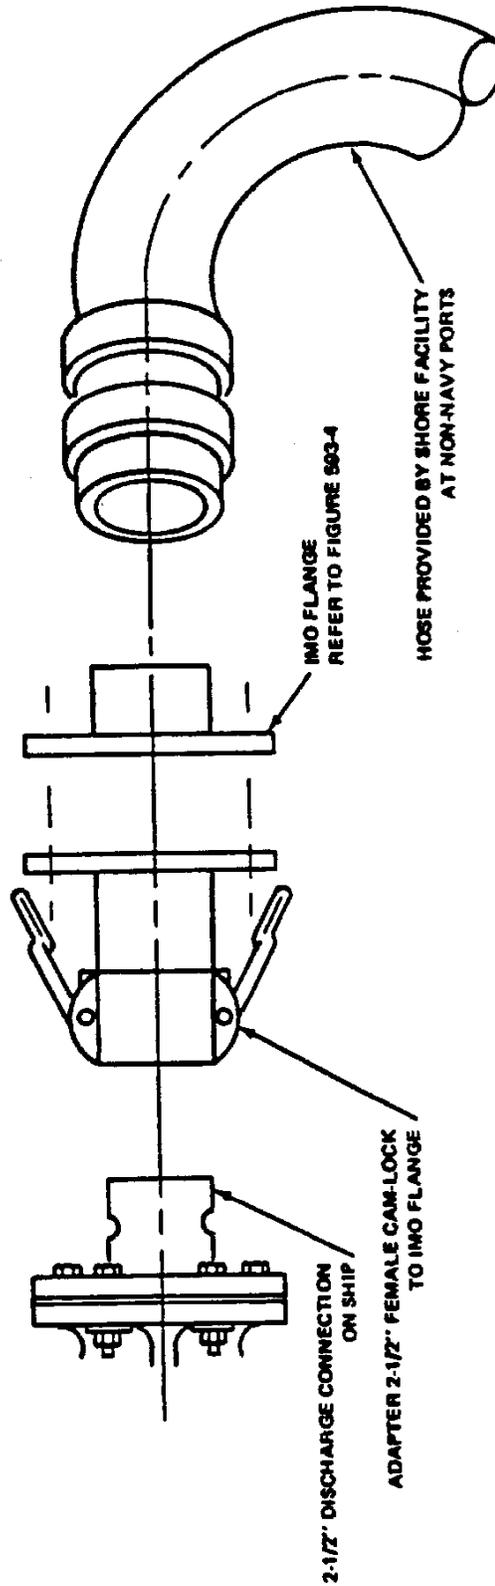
Adapter 2-1/2 Inch Female Cam-Lock to IMO Oil Waste Flange
